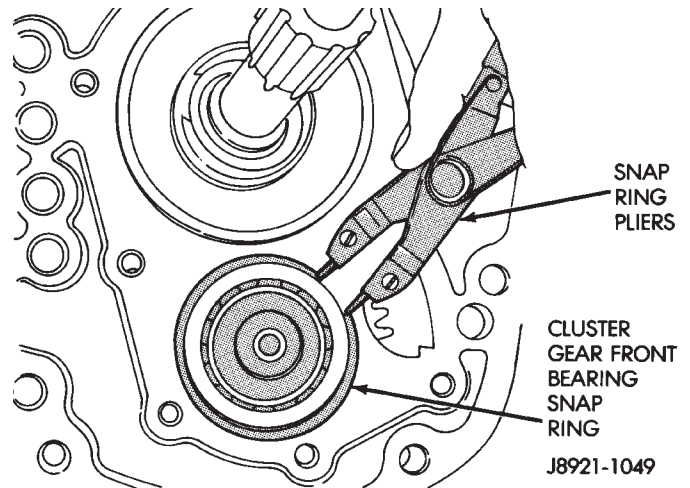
Removing Cluster Gear Front Bearing Snap Ring
